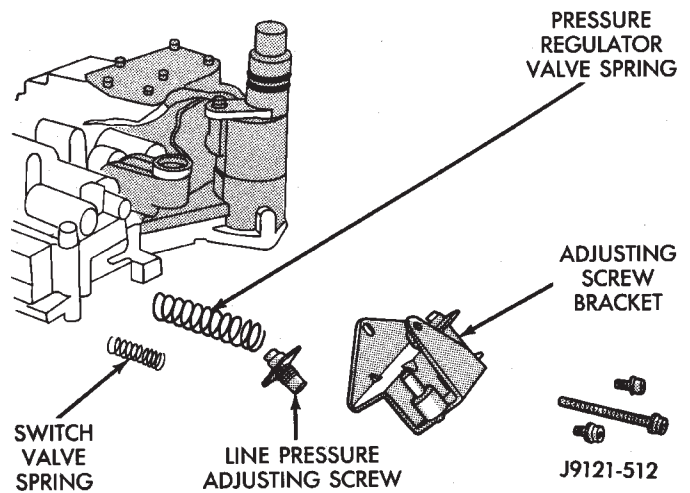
Adjusting Screw Bracket And Spring Removal—46RH
